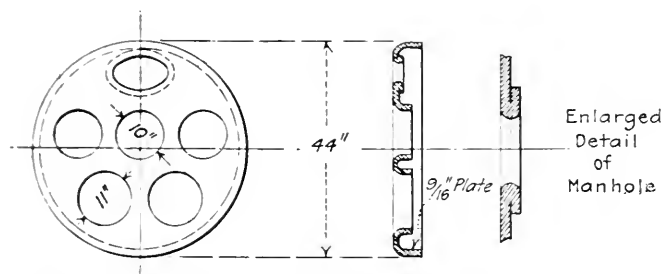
SPECIAL CONSTRUCTION OF MANHOLE OPENING
